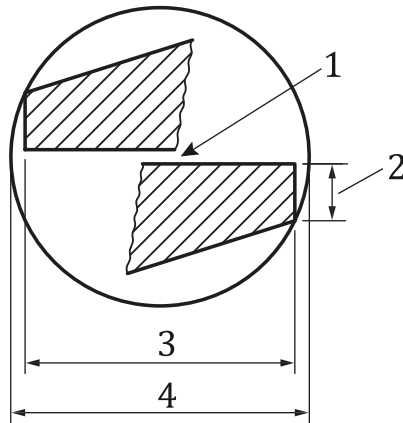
Example of test arrangement for shift error — Internal measurement
